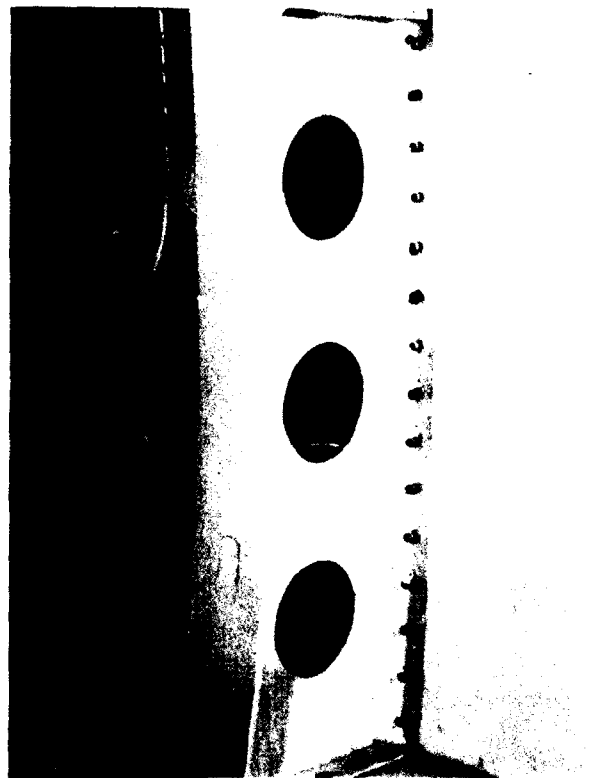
View of lightening hole failure No. 1 showing damage to shear web and inner flange.
